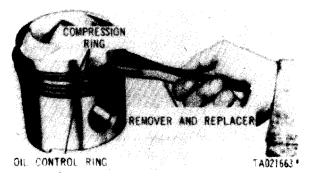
Removing or installing piston compression rings. using remover and replacer.
